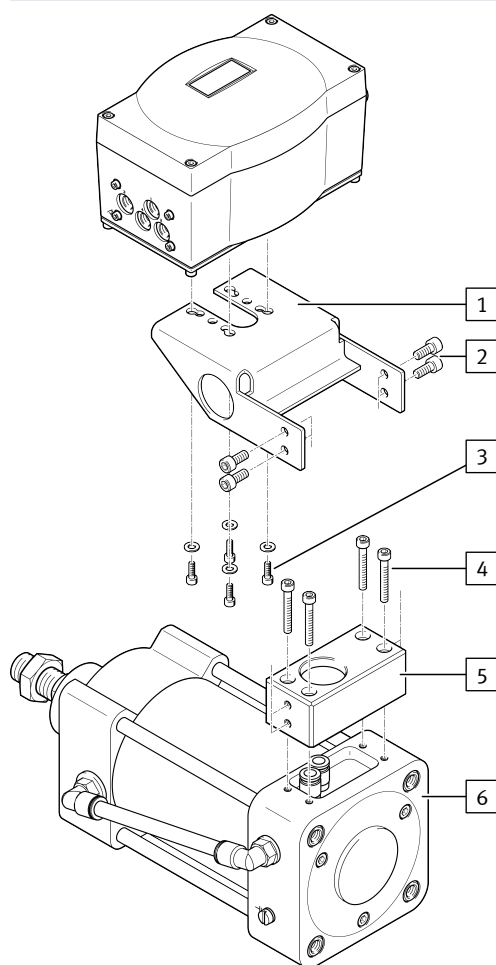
Mount CMSX-P-SE-... on the drive DFPI-...-E-NB3-...
